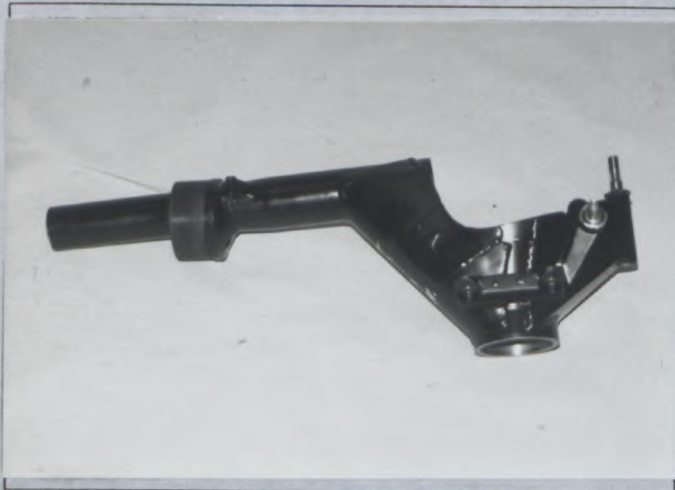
REINFORCED UPRIGHT, TYPE B
